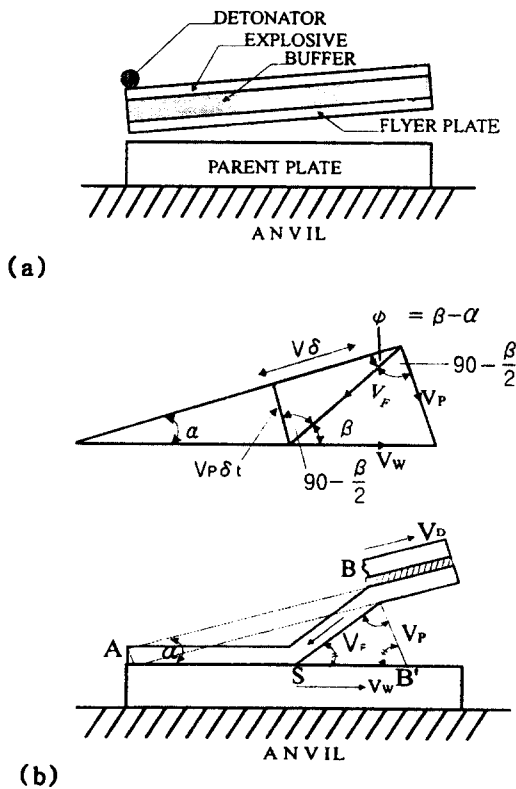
Inclined Arrangement for Explosive Welding
